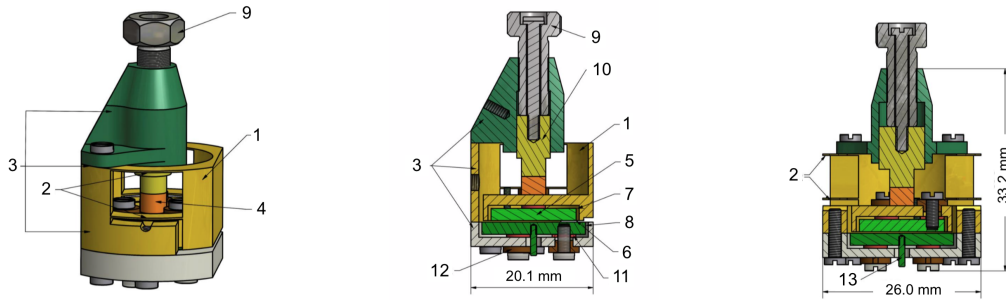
Technical drawings of the uniaxial stress capacitive dilatometer. Shown are three dimensional view (left), full section side view (middle) and full section front view (right). The different constituents of the uniaxial stress dilatometer are indicated by numbers ranging from (1) to (13). A detailed explanation of the components is provided in the main text. [113]
